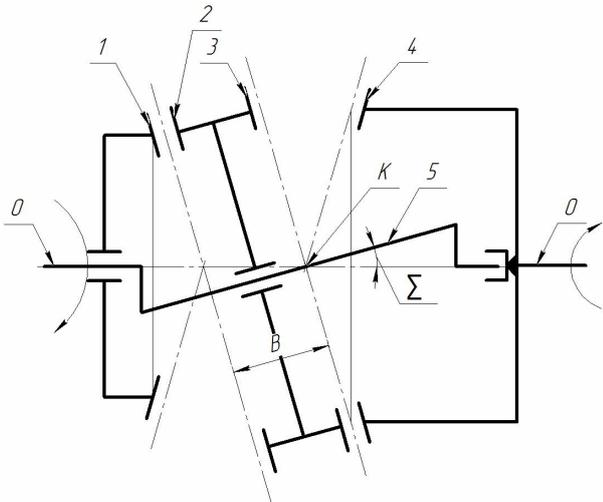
Scheme of coaxial gearbox based on precessional bevel gear
